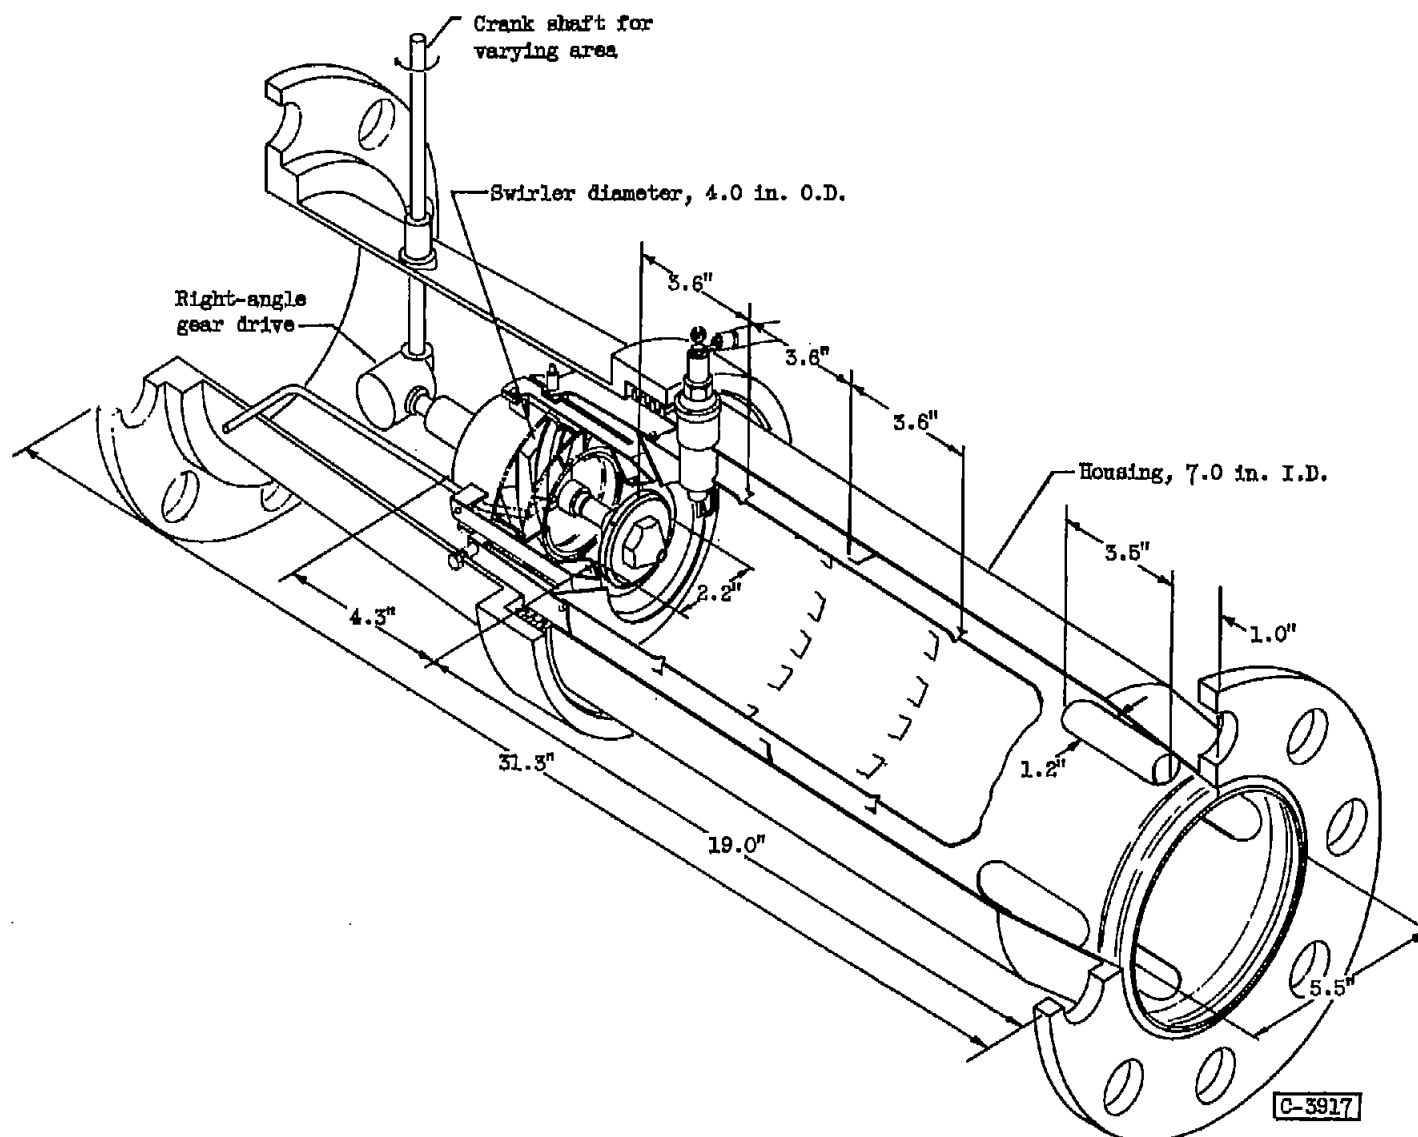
Mechanical positioner and basic dimensions of variable-area combustors investigated.
